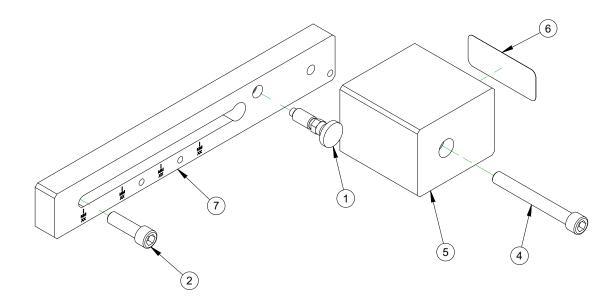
ID CHUCK ASSEMBLY (P/N 89990)
